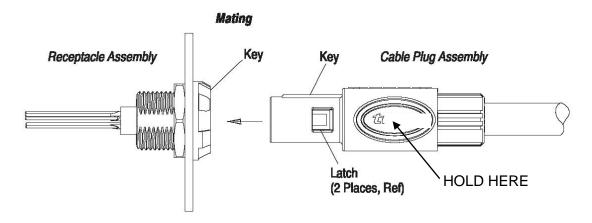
Mating the Connectors – Cable Plug Assembly Key is aligned with Receptacle key
